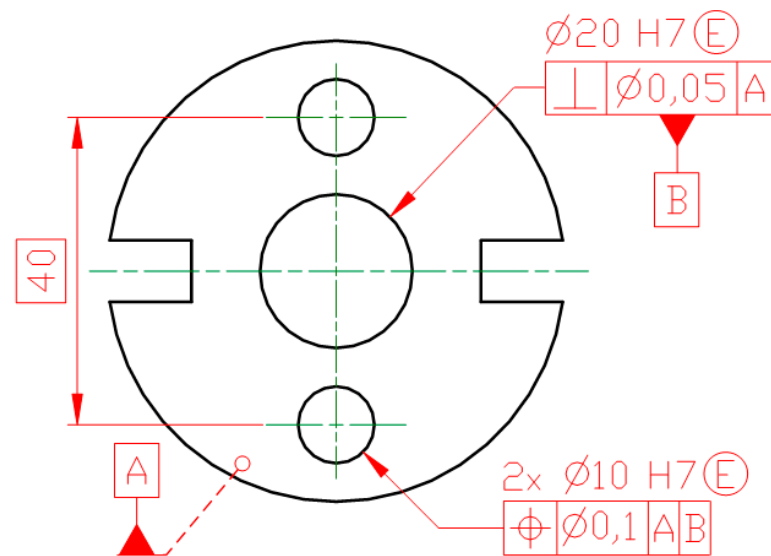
Position tolerance with one tolerance indicator for two holes—according to ISO 5458:1998, the holes, by default, constitute the pattern.
